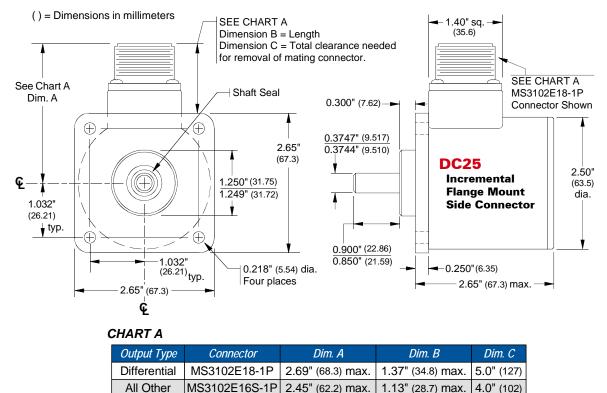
Aluminum Body, Flange Mount, Side Connect Outline Drawing
